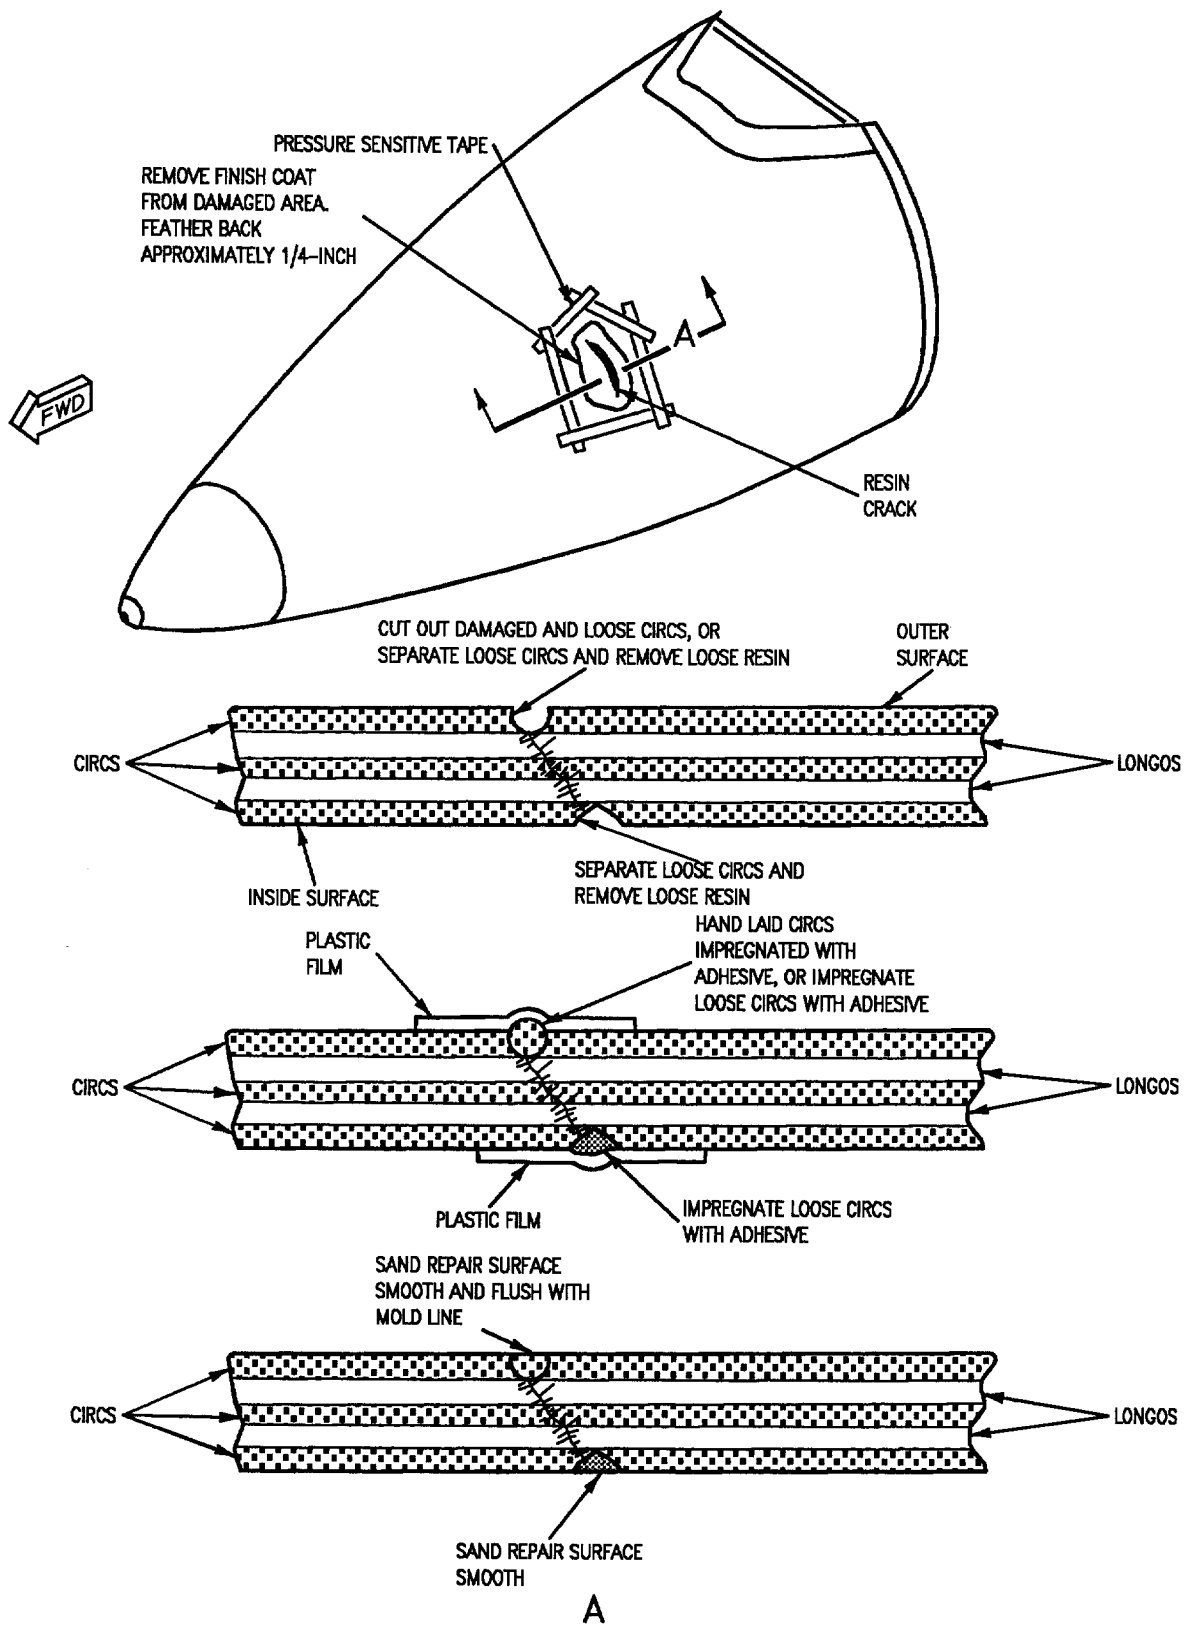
Repair of Resin Cracks Through Wall, Class III Damage
